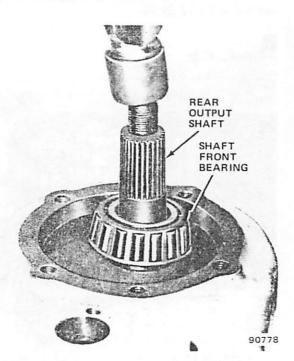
D-80 Rear Output Shaft Front Bearing Removal
